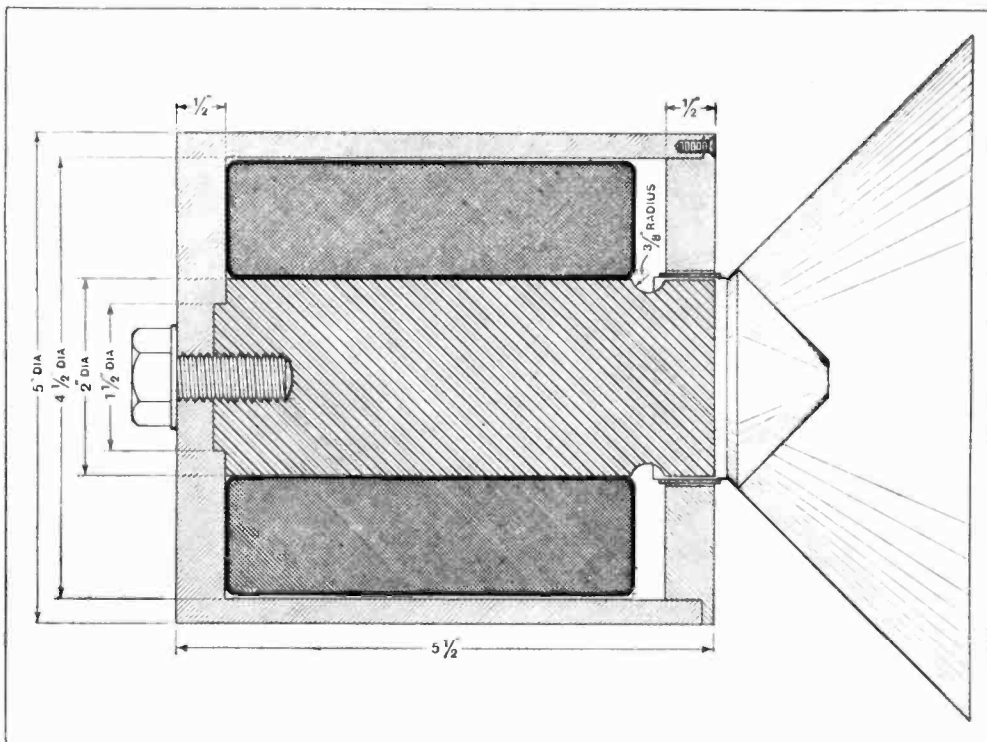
(a).—Section of field magnet and windings showing position of cone and moving coil.
